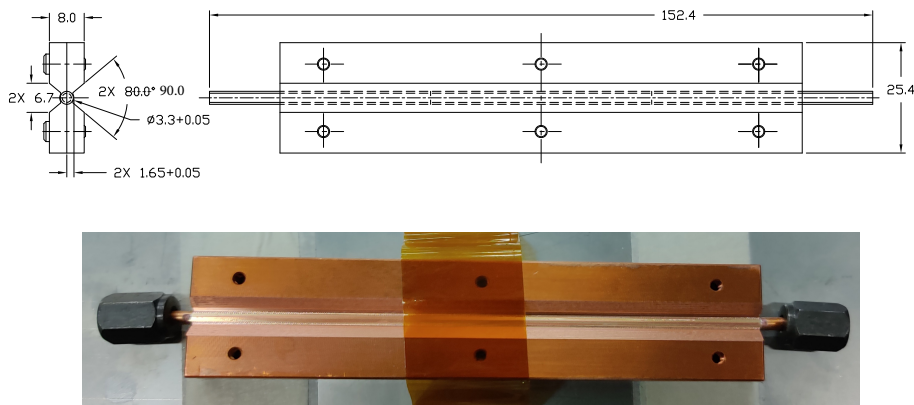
Test piece of the vacuum chamber showing dimensions (top) and the machined chamber (bottom).
